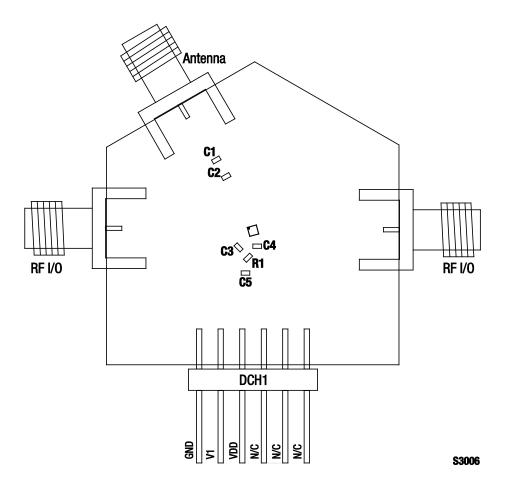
SKY13448-001 Evaluation Board Assembly Diagram
